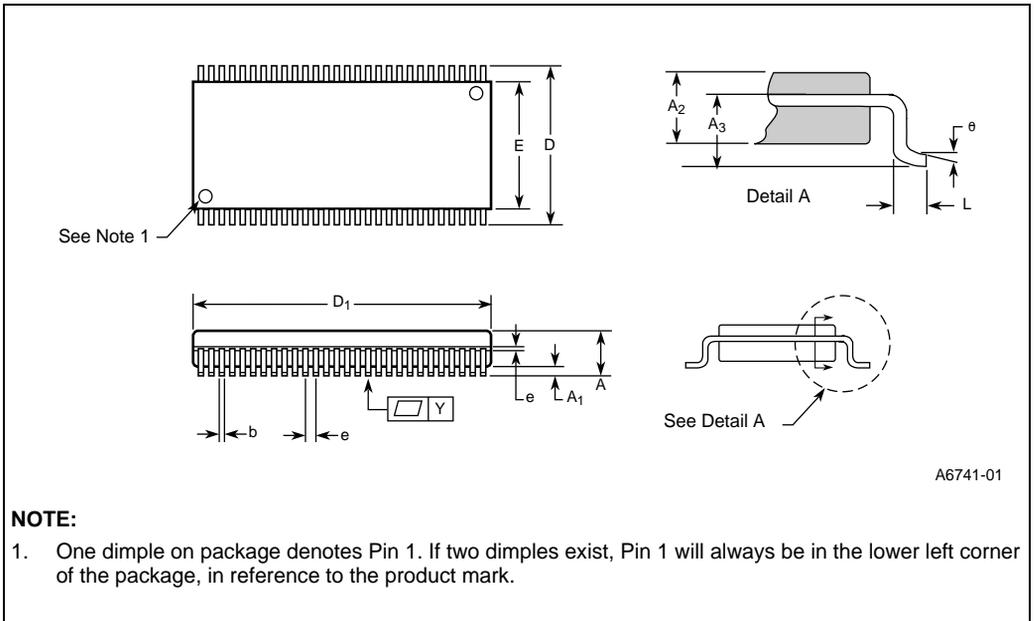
56-Lead SSOP Package Drawing and Specifications
